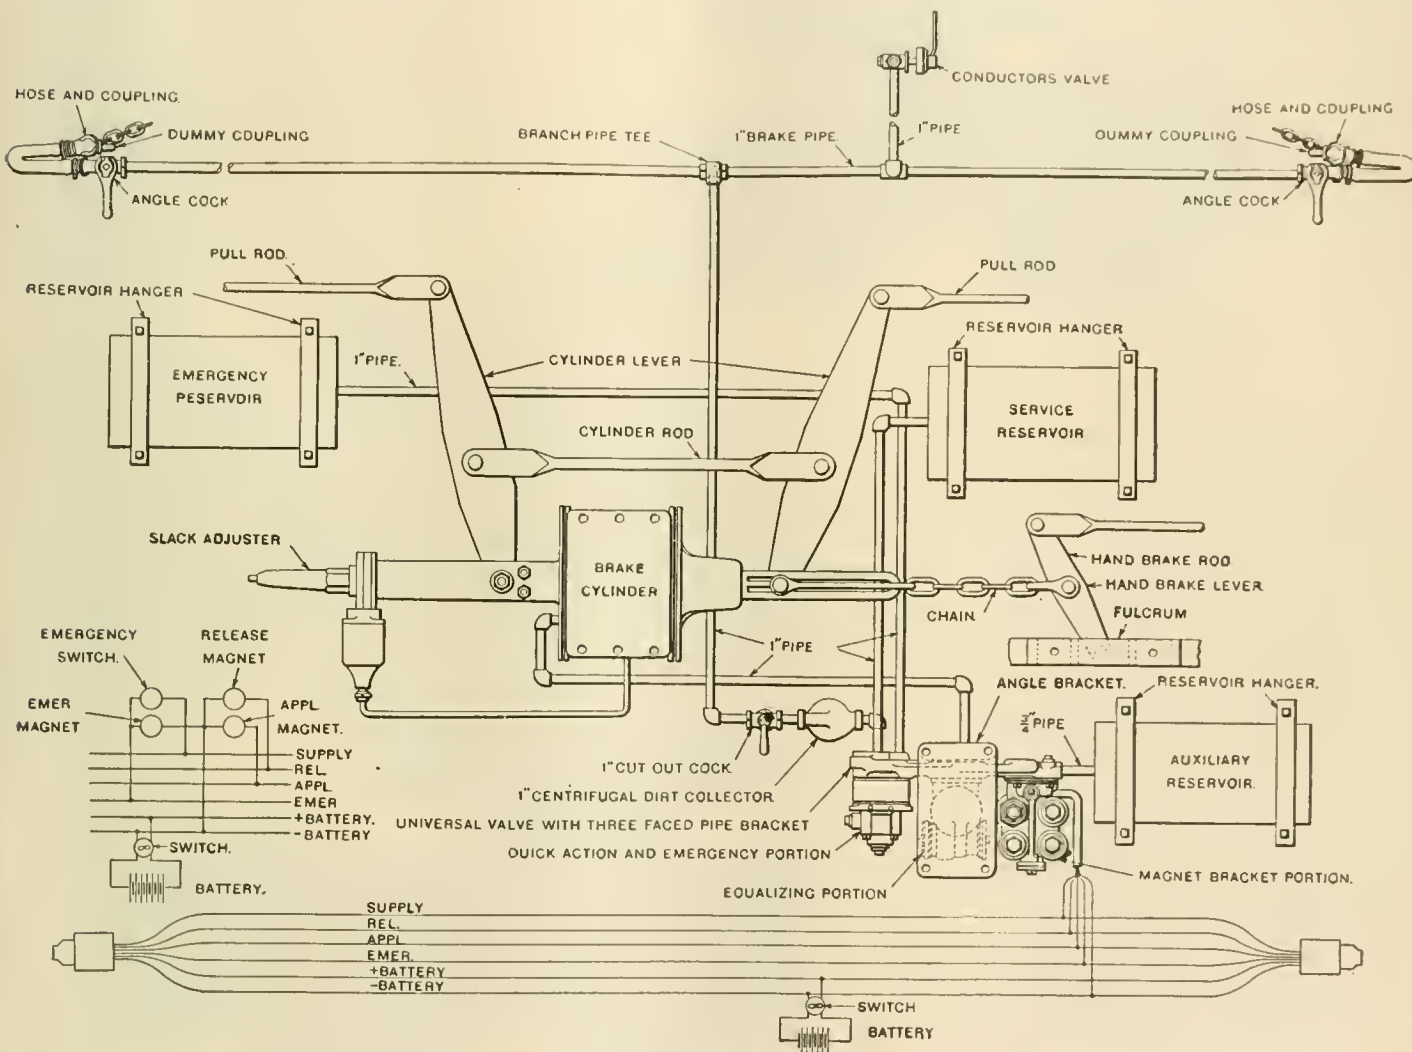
UNIVERSAL COMMON STANDARD ELECTRO-PNEUMATIC BRAKE EQUIPMENT.
